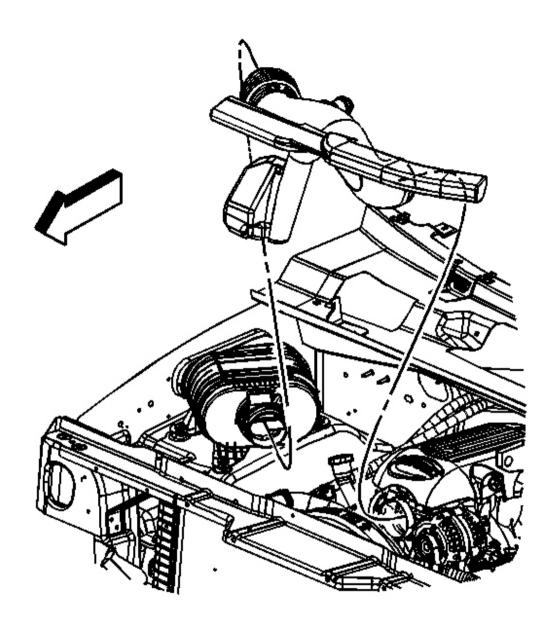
Air Cleaner Outlet Duct Courtesy of GENERAL MOTORS CORP.
